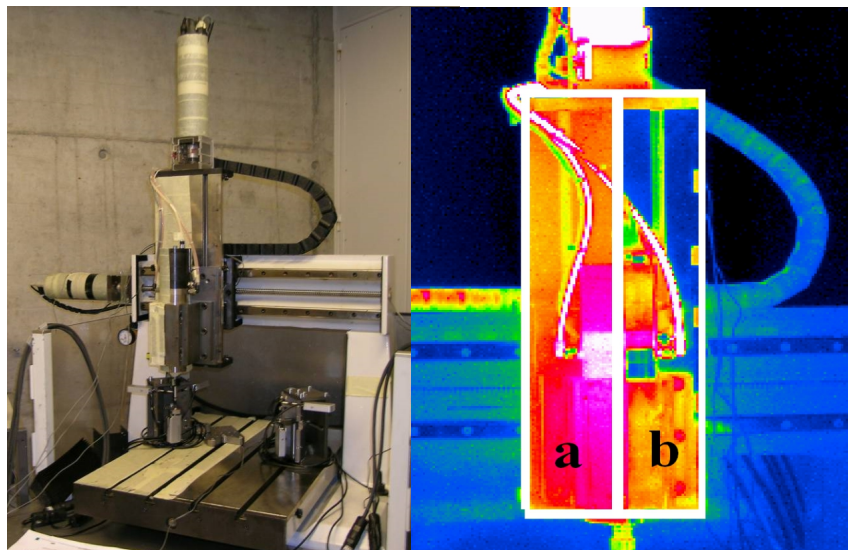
Left: three axis milling machine; right: infrared temperature measurement of the Z-axis with (a) surfaces prepared with adhesive tape and (b) unprepared metallic surfaces of spindle housing [2].
